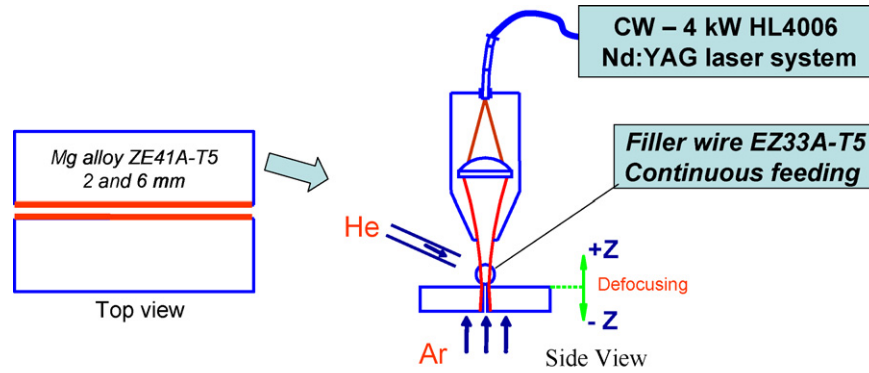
Experimental setup for laser welding of Mg alloy using continuous feeding mechanism connected with the laser head.
